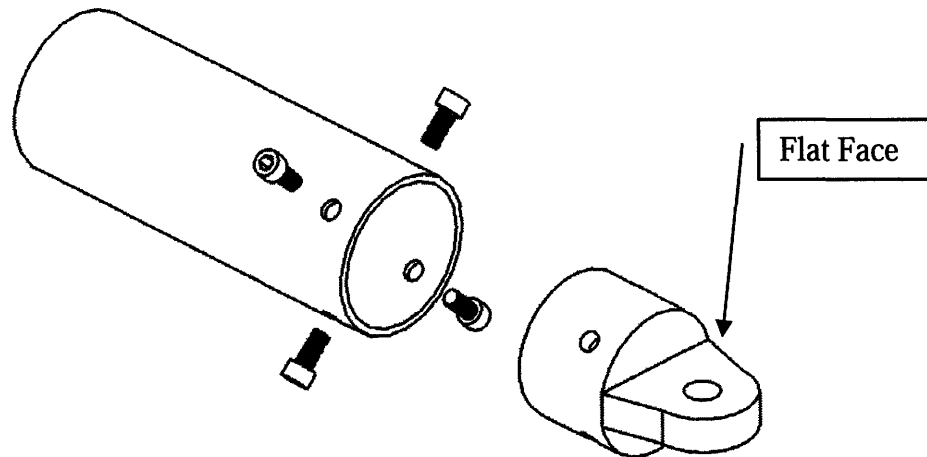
Assembly of a hand piece with the robot end of the robot manipulator.
